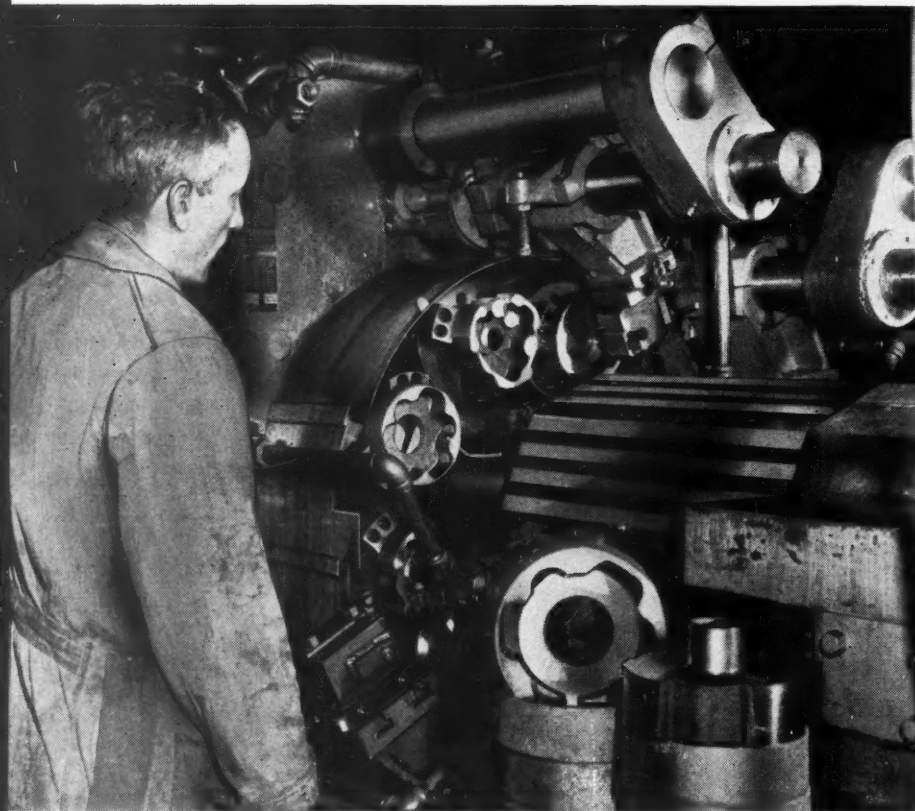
Both front and rear halves of the transmission planetary cages are rough- and finish-bored and faced on an eight-spindle chucking machine
